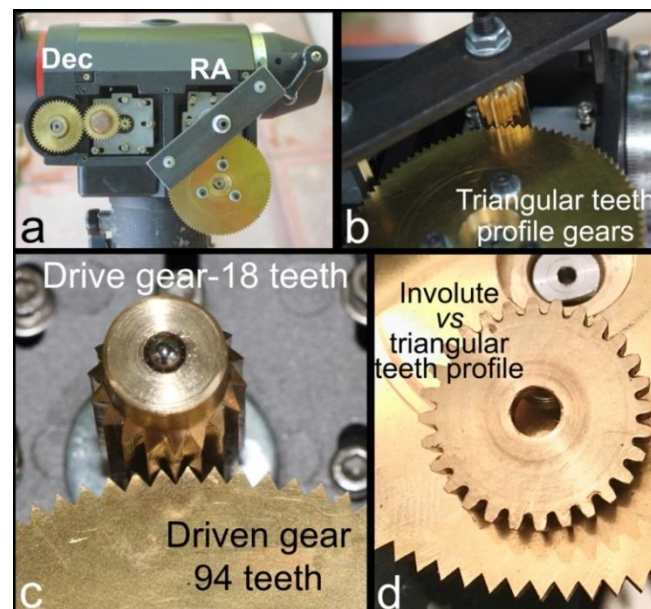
Replacement of the (Right Ascension axis - RA) modern gears (with involute tooth shape) with the Antikythera Mechanism style gears (triangular tooth shape) on the Equatorial mount-1: a – on the Equatorial mount-1, the two gears of the clock drive were replaced by gears with triangular tooth profile, as are the gears of the Antikythera Mechanism. The gears of the Declination axis (Dec) were not replaced; b – a bar with a screw; c – a bearing ball was placed in order to avoid the precession of the drive gear axis during its rotation. By applying a fast rotation of the input gear, the triangular teeth engagement produces a characteristic sound like a ‘*gun machine rattle*’ (<https://www.youtube.com/watch?v=h-qpXYK3bIs>); d – the difference between the involute and the triangular teeth profile. Bronze parts construction and image by Aristeidis Voulgaris.
